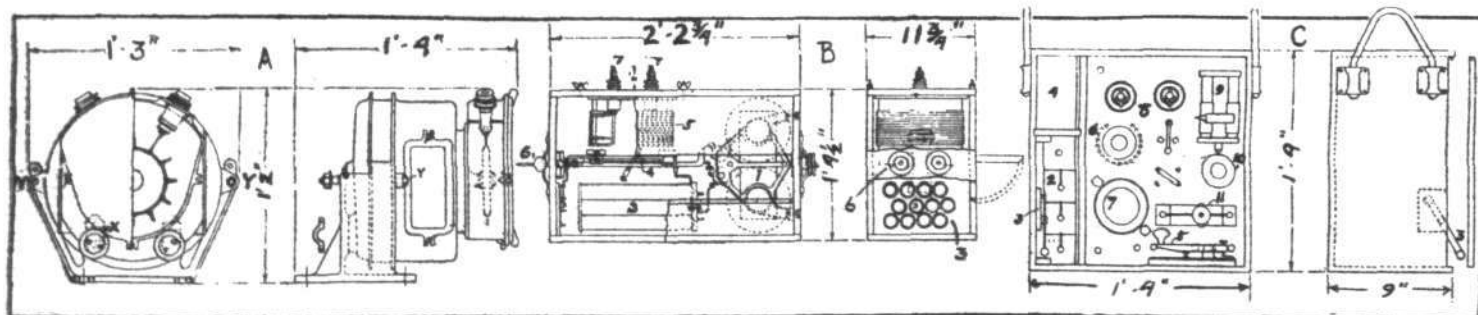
Detail views of the three Marconi units as fitted to a Morane-Saulnier monoplane. A, high frequency alternator and rotary disc-discharger. B, transmitting unit; 1, transformer; 2, choke coils; 3, condensers; 4, jigger primary; 5, jigger secondary; 6, disc-discharge terminals; 7, aerial and counterpoise terminals. C, receiving unit; 2, batteries; 3, battery cut-out; 4, telephones; 5, operating key; 6, aerial tuning inductance; 7, detector-crystal holder; 8, switches; 9, valve-tuning condenser; 10, intensifier; 11, potentiometer.
